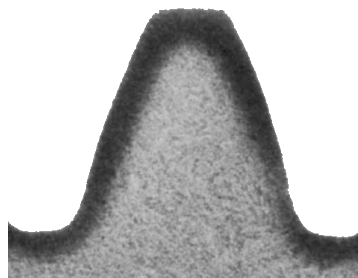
Section view of a carburized tooth showing the soft core material (light) and the carbon rich hard outer layer (dark).
